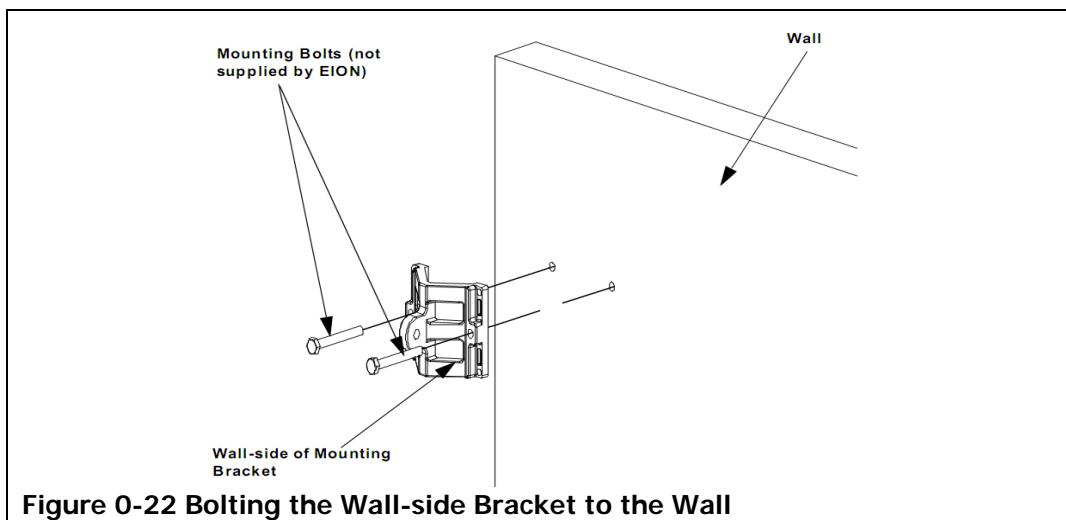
Bolting the Wall-side Bracket to the Wall
